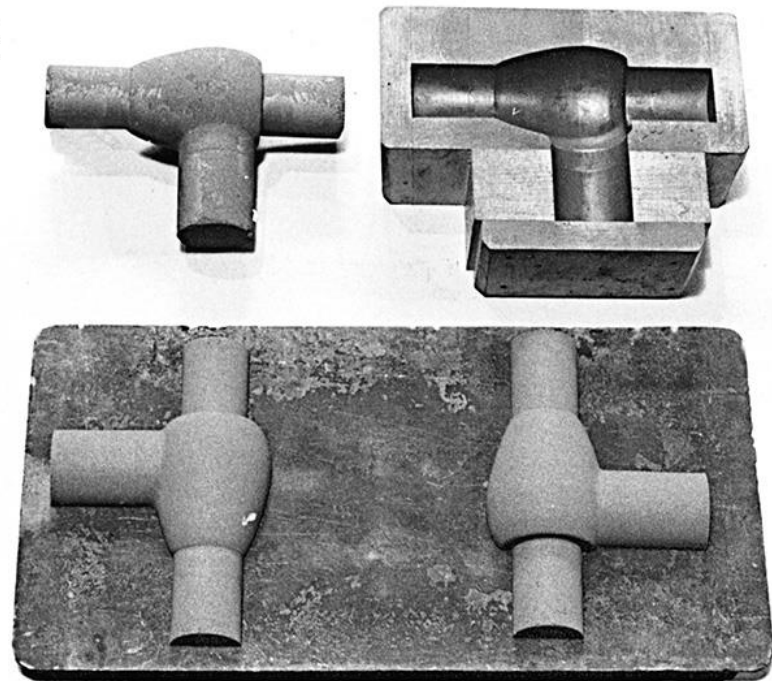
(Right) Upper Right; A dump-type core box; (bottom) core halves for baking; and (upper left) a completed core made by gluing two opposing halves together.
